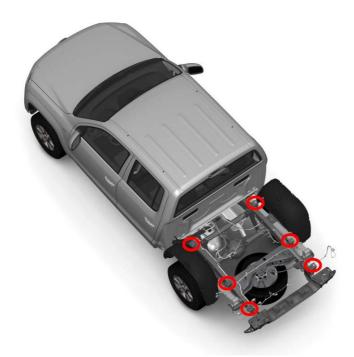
Amarok Double Cab – mounting brackets for cargo box (see red mark!)
